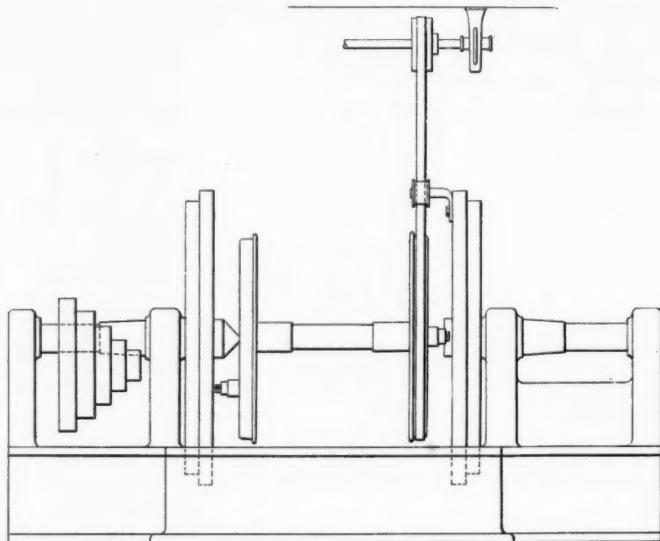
Attachment on Wheel Lathe for Turning Driving Journals. Drury.
